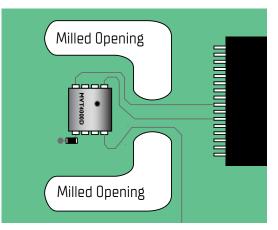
Thermal isolation of sensor using milled PCB openings.
